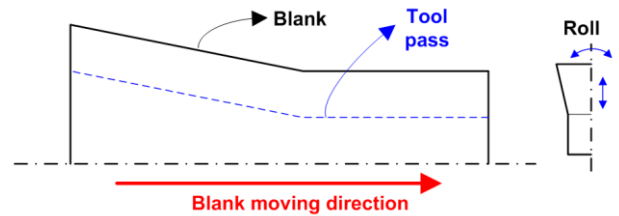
Tool pass for flexible roll forming of U-channel profile
